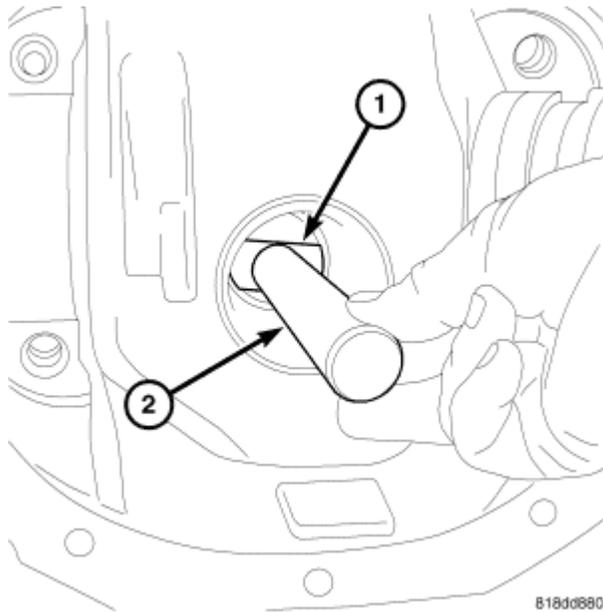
Removing Front Pinion Bearing Cup With Remover C-4345 And Handle C-4171
